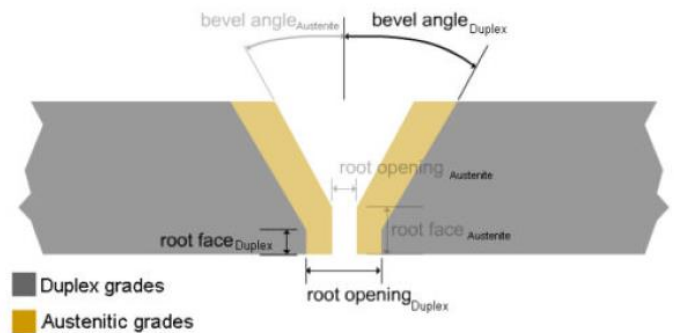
DSS VERSUS AUSTENITIC STAINLESS STEEL JOINT PREP FOR SINGLE-SIDED GROOVE WELD
